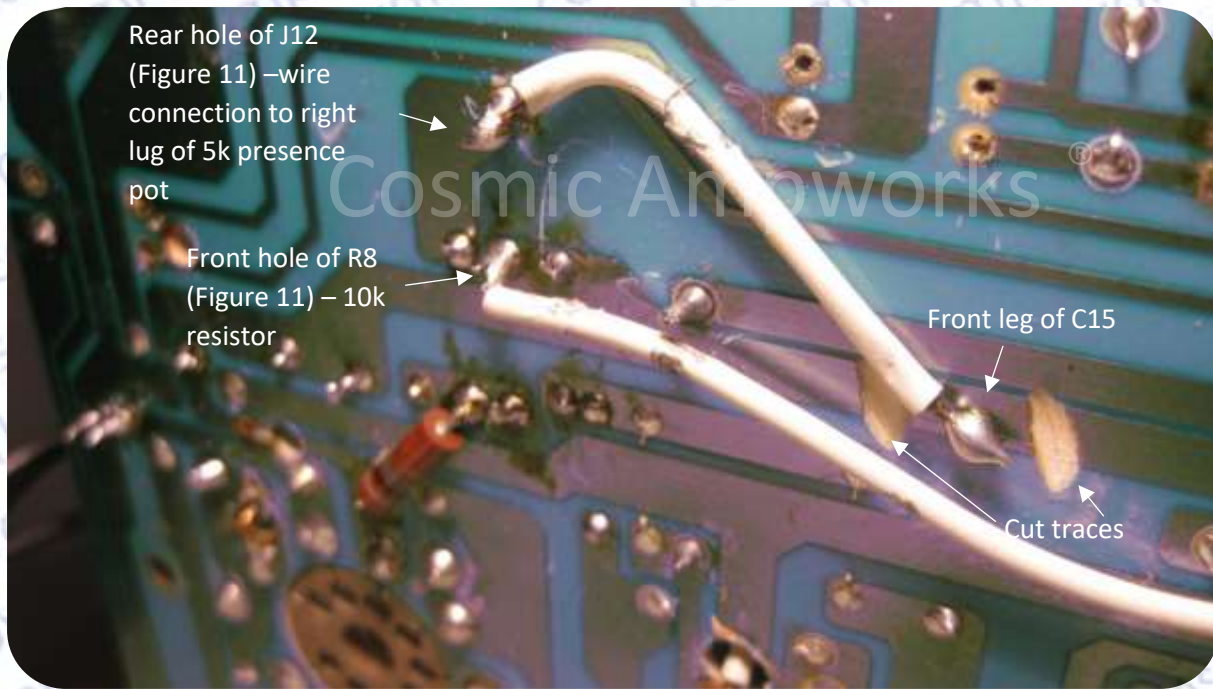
Interrupt the PCB traces on either side of the front leg of C15. Cut a length of single stranded wire about of 4.5 cm. Underneath the board, solder one end of it into the rear hole of J12; solder the other end to the front leg of C15 (also underneath the board). Be careful not to heat the leg of C15 for too long with the soldering iron, because it is very short and the heat might damage the capacitor!
